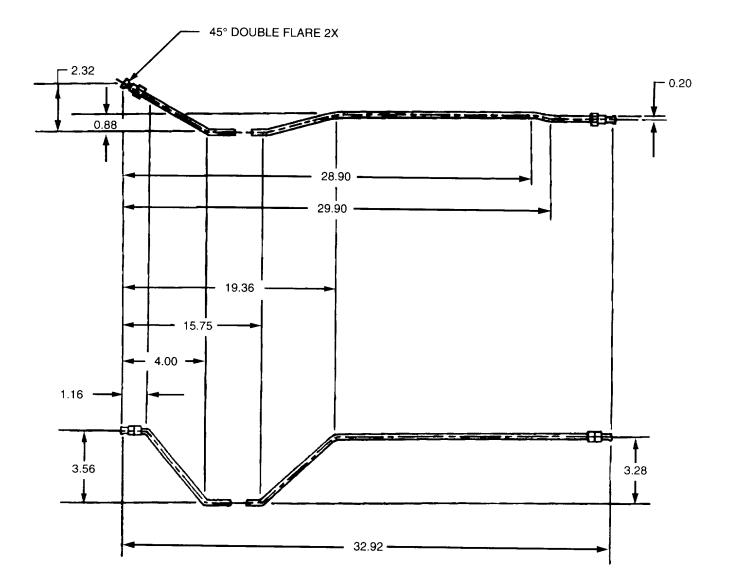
Hydraulic Brake Tube Assembly, Left (M101A3 and M1 16A3)
